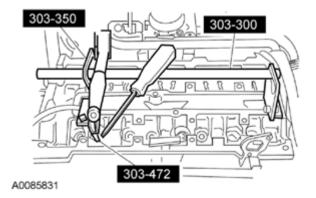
Installing Valve Spring Using Valve Spring Compressors Courtesy of FORD MOTOR CO.
